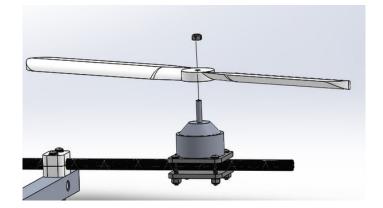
The propeller is placed on the protrusion on top of the motor and then secured to the motor with the motor's provided screws.
